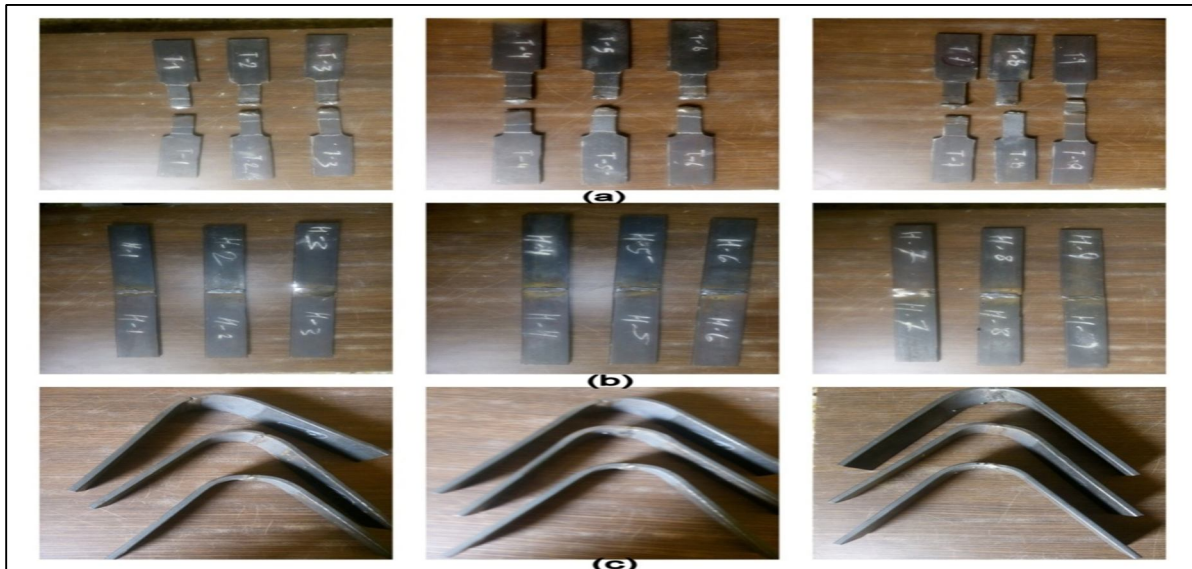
work specimens after testing (a) Tensile test, (b) Bending test
